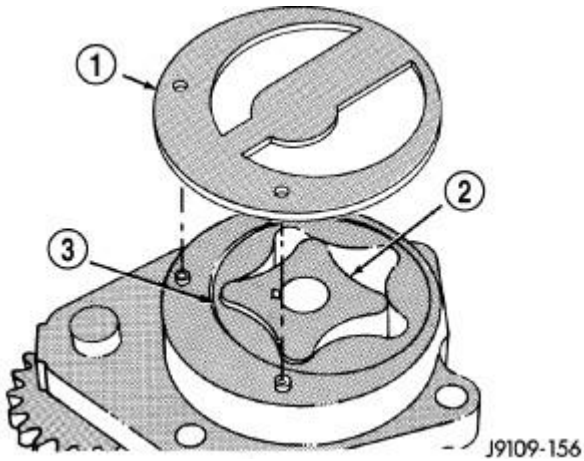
Oil Pump Back Plate, Gerotor & Gerotor Planetary
